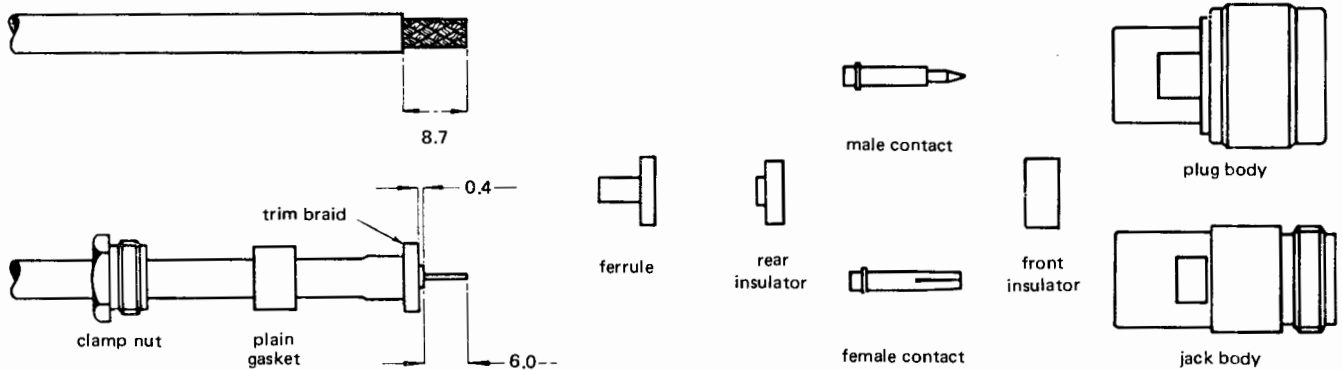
Pressure sleeve cable clamp, captive centre contact (for large cables)
